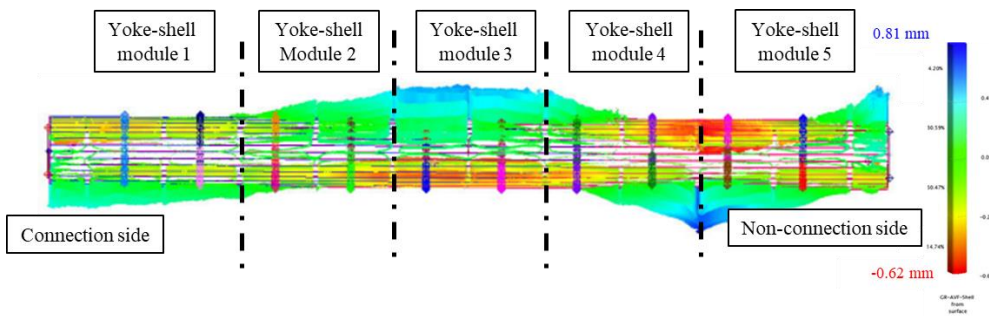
View from the top of the outer surface of the yoke-shell subassembly of MQXBP3 magnet.
